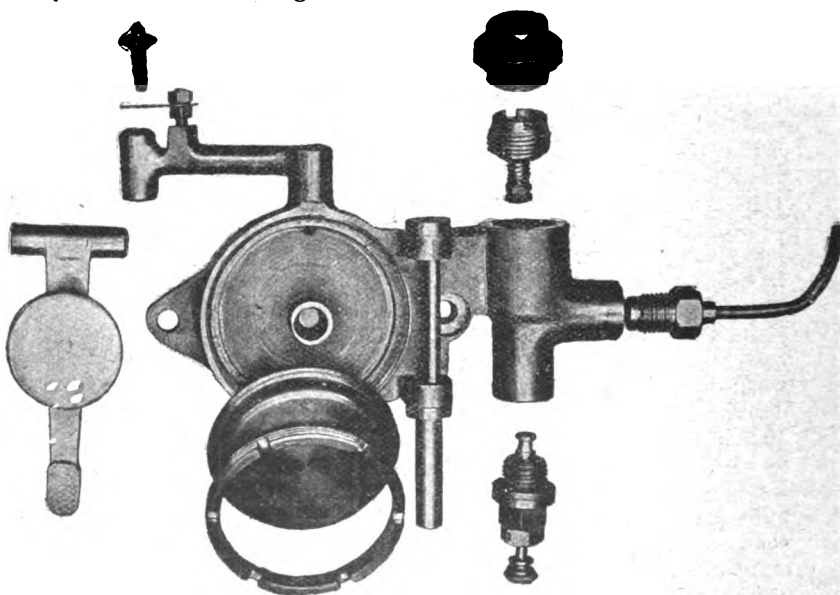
THE PARTS OF THE "MOTORMOBILE" CARBURETTOR.
